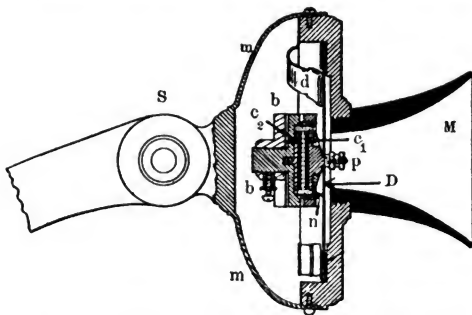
SECTION OF "SOLID BACK" TRANSMITTER.
